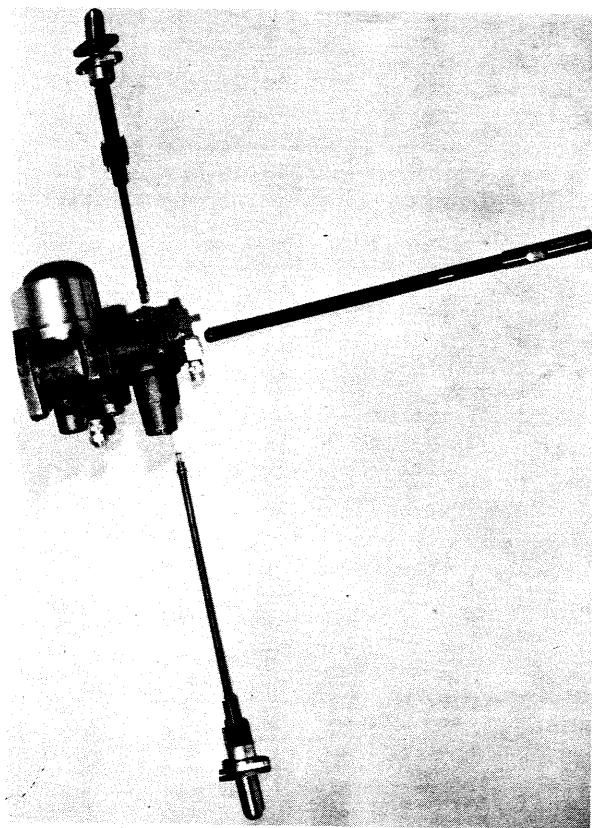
Regenerator Drive and Oil Pump Assy.
